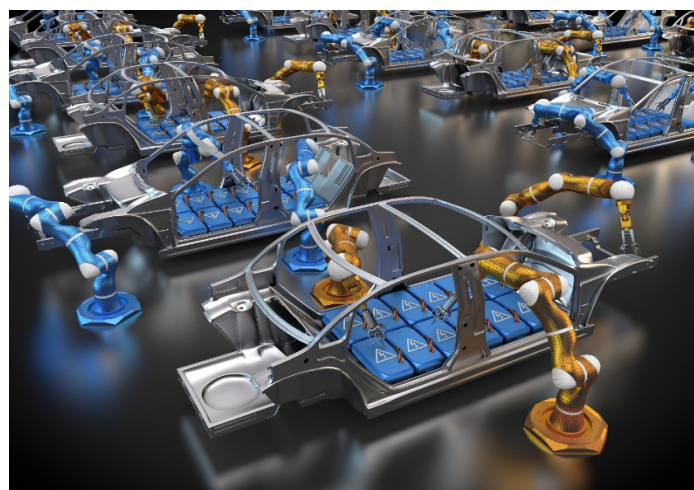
Battery welding/Source: Adobe Stock
